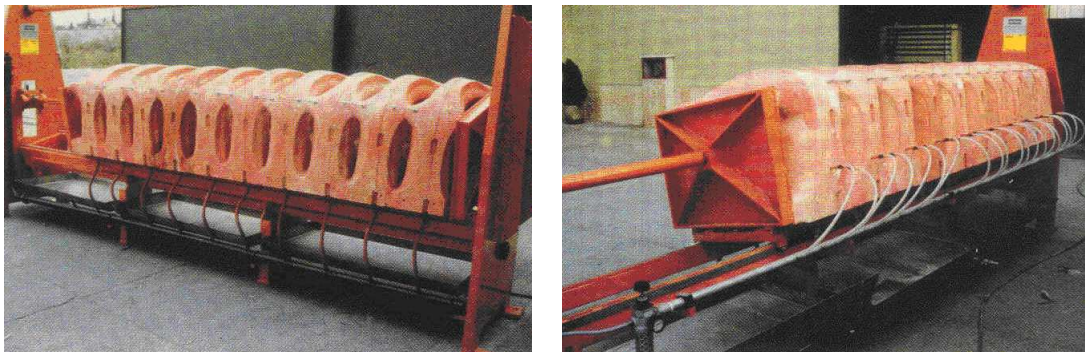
A medium pressure casting machine can come with a series of plastic molds mounted on a bench-type frame and hoses that provide air for dewatering the molds [5]
